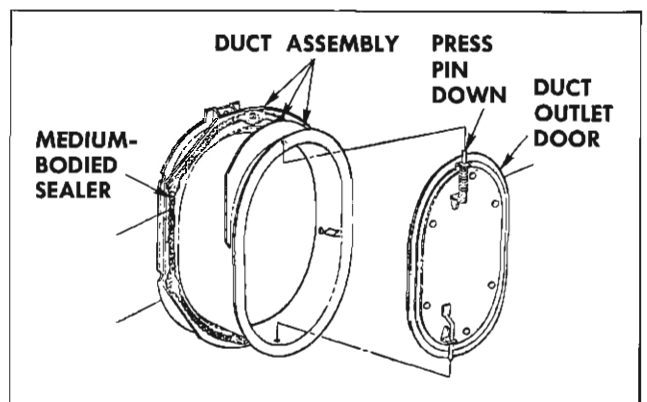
Air Outlet Duct Assembly and Sealing
